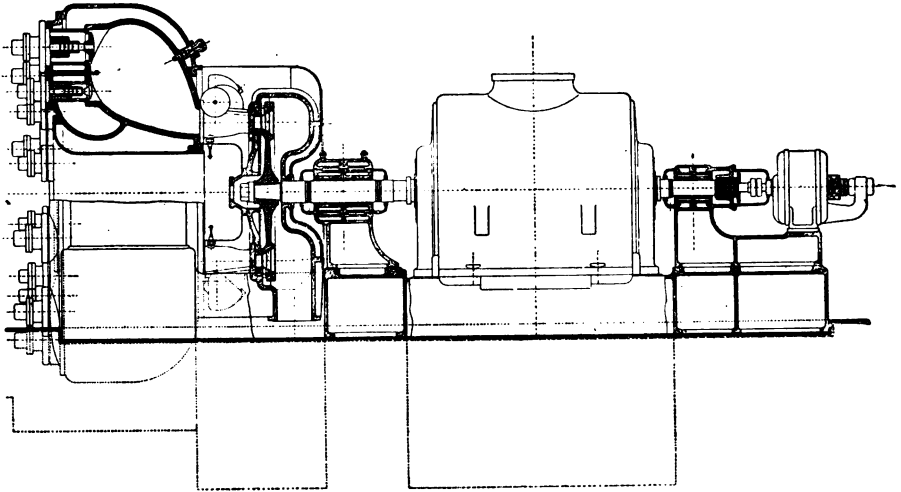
Section through 1000-H.P. horizontal gas turbine, with dynamo.
